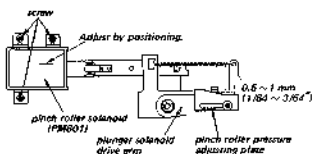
Pinch roller solenoid (PMB01) position adjustment
